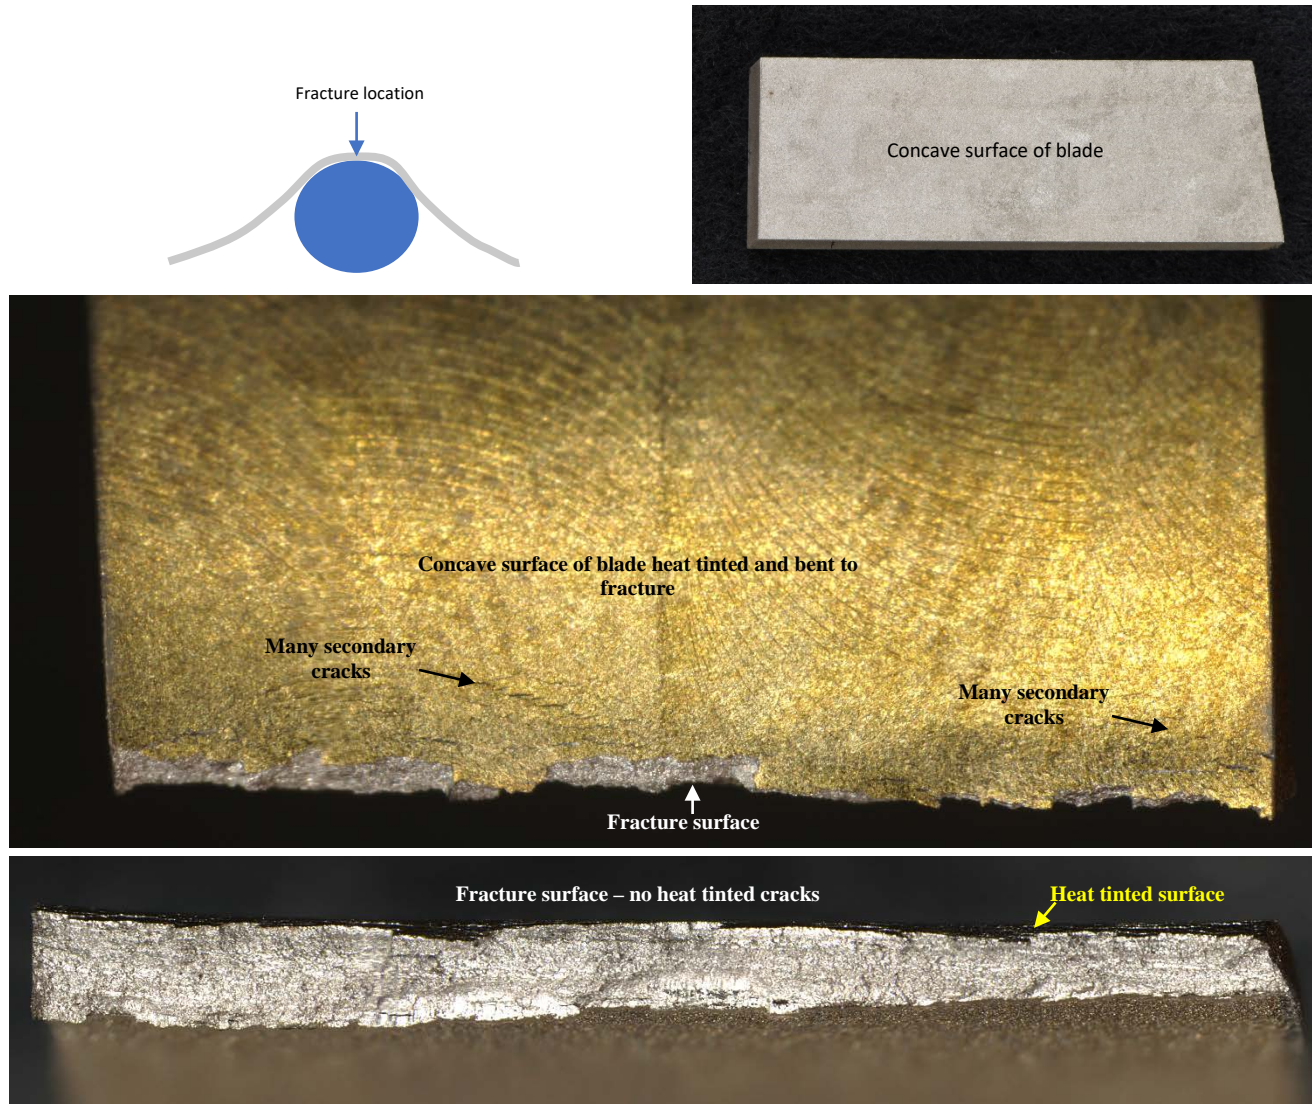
Images showing the heat tinted bend test sample after fracturing. Multiple secondary cracks were observed on the bent surface. No heat tint areas were observed on the fracture surface.
